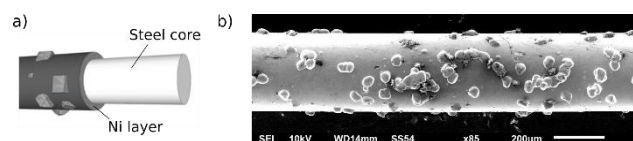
(a) Steel core and Ni-filler layer of a diamond wire
